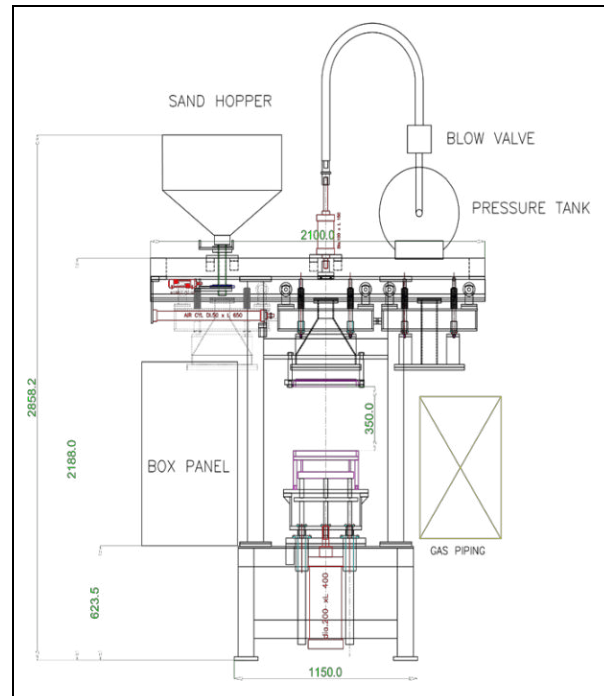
Complete 2D technical design of the horizontal shell core casting machine from front view.
